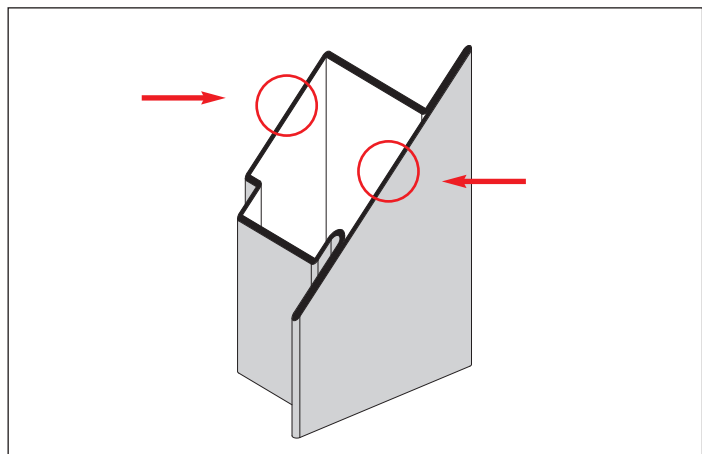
Welding edge preparation for Jansen-Economy 50/60
